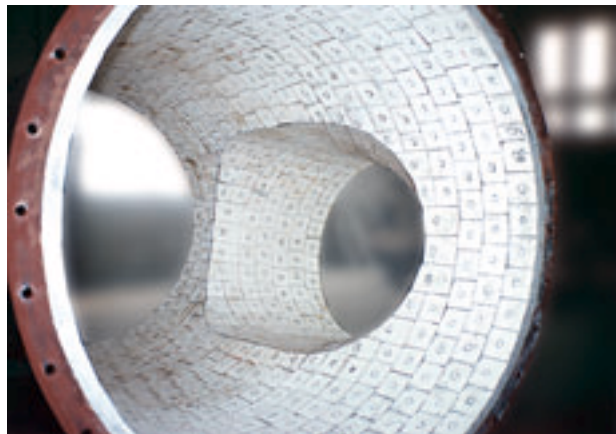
KALOCER high alumina ceramics lining of a separator component with mechanically fixed standard tiles 100 x 100 mm
